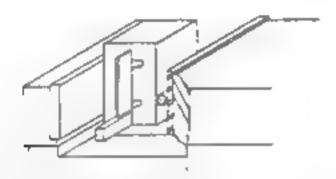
Using a precision maximum a square to set a part perpendicular in a shaper vice.
